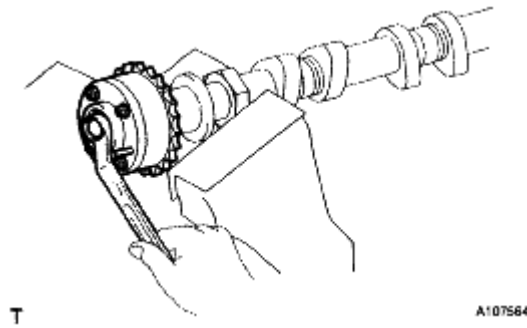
Checking Camshaft Timing Exhaust Gear Lock
